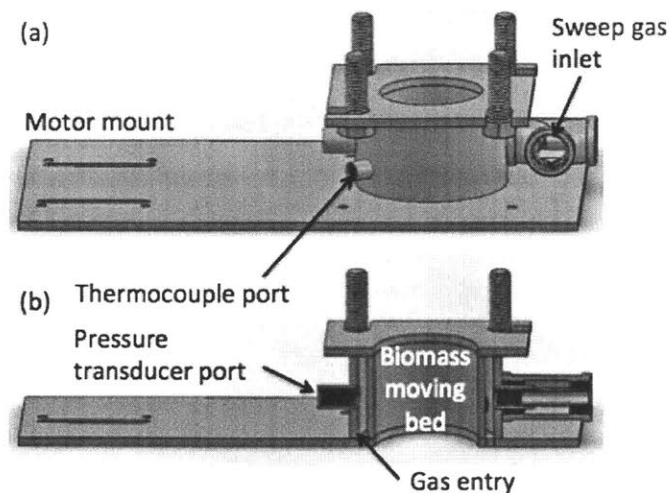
(a) SolidWorks rendering and (b) cutaway view of the upper gas sampling port component, which also includes an extension for the motor mount.
